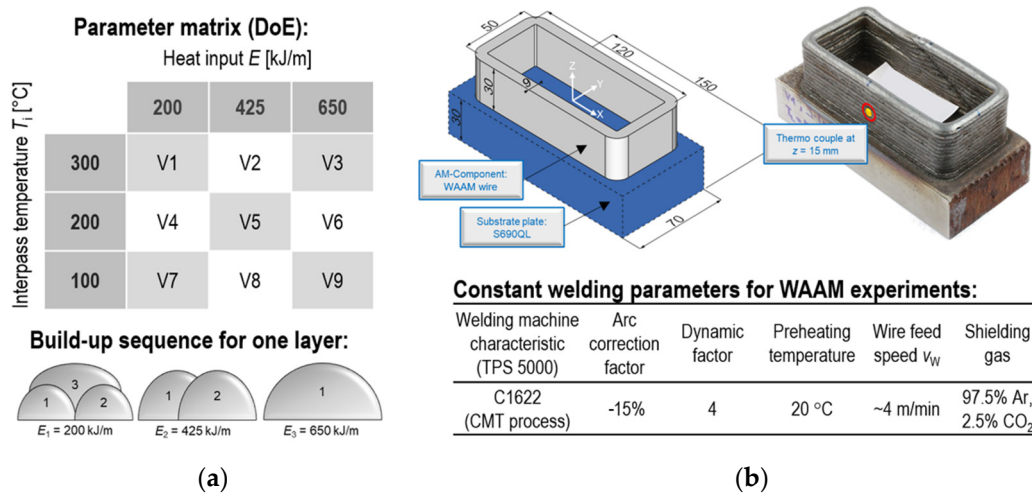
(a) Parameter matrix and build-up sequence for 9 mm wide layer for WAAM experiments; (b) specification of the reference geometry (open hollow cuboid): CAD model (left), weld result (right), welding parameters (bottom).
